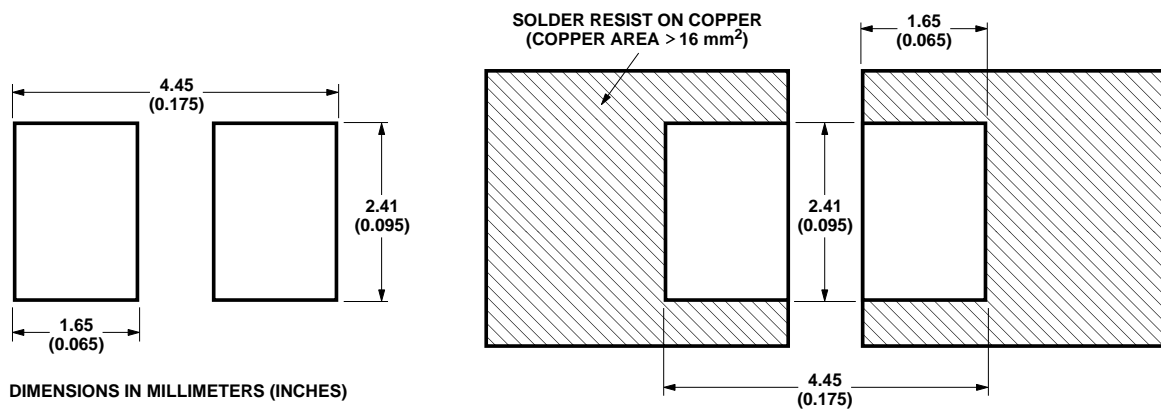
Recommended Solder Pad Dimensions and Pad Design.
